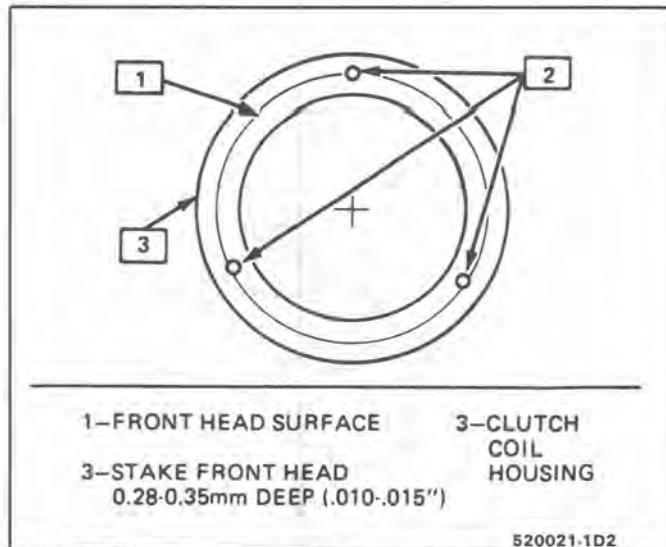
Details of Stakes In Front Head for Clutch Coil
